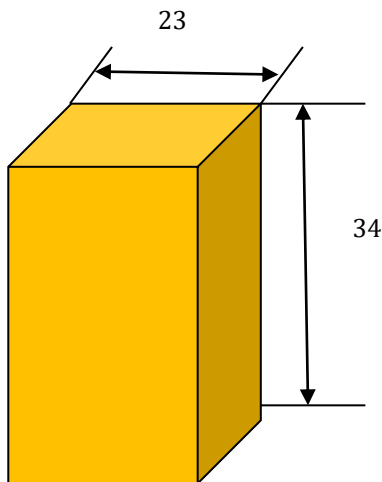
Outer Cabinets Dimension for Condenser & Evaporator
